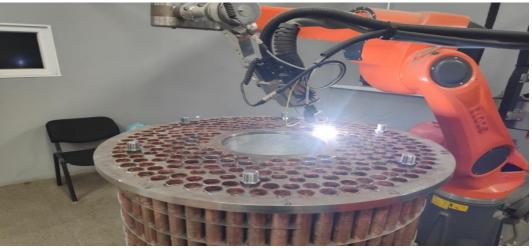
The pilot welding of a circular row of pipes to the tubular plate
